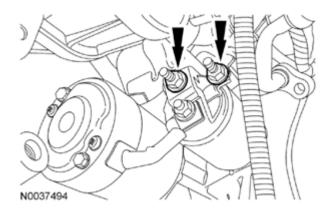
Locating Starter Motor Harness Wire Nuts Courtesy of FORD MOTOR CO.
